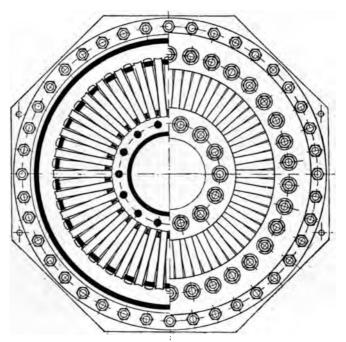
Straker heavy-freight steam vehicles. Sectional plan view of boiler.
